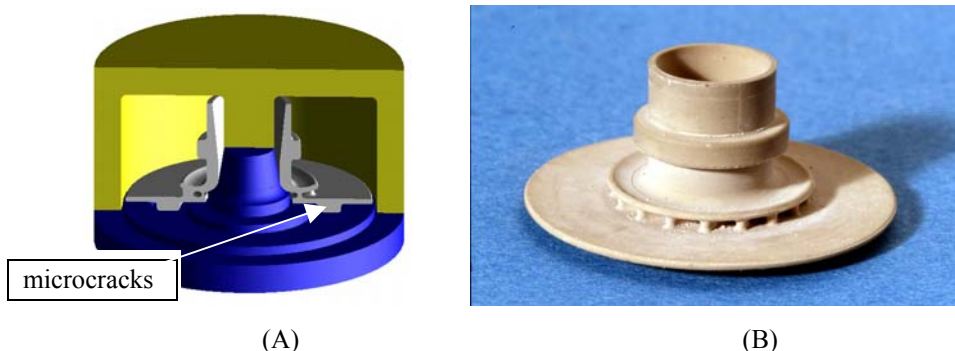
Ceramic inlet nozzle. (A) Cross-section of sintering fixture and inlet nozzle. (B) As-sintered inlet nozzle.
